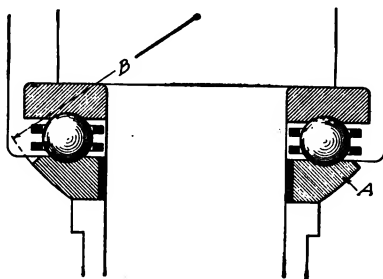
Annular Ball Bearing Mounted for Thrust Loads
